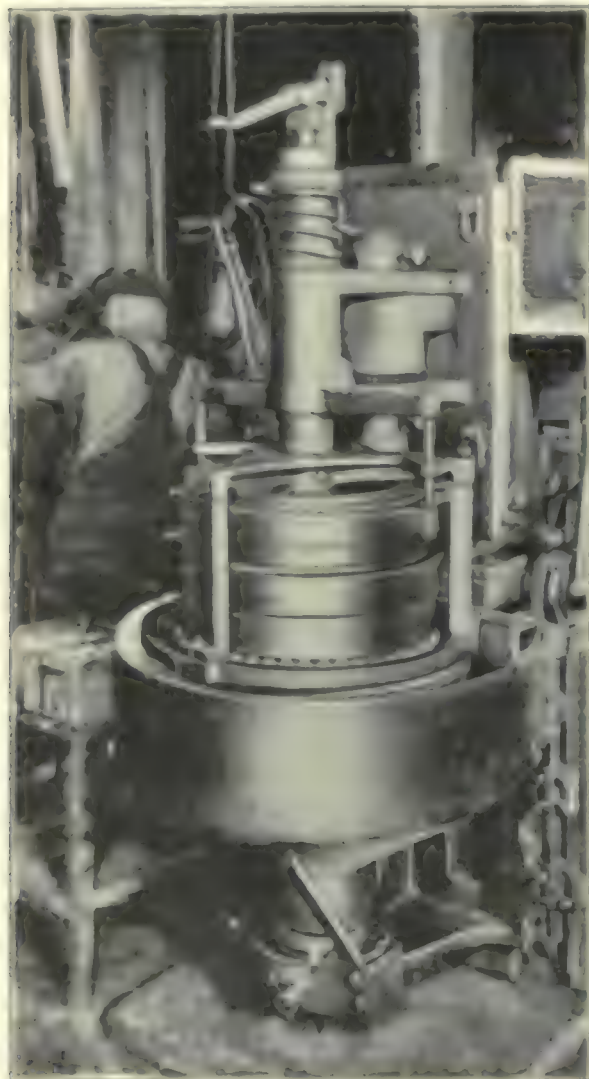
ROUGH GRINDING MACHINE (VERTICAL)
